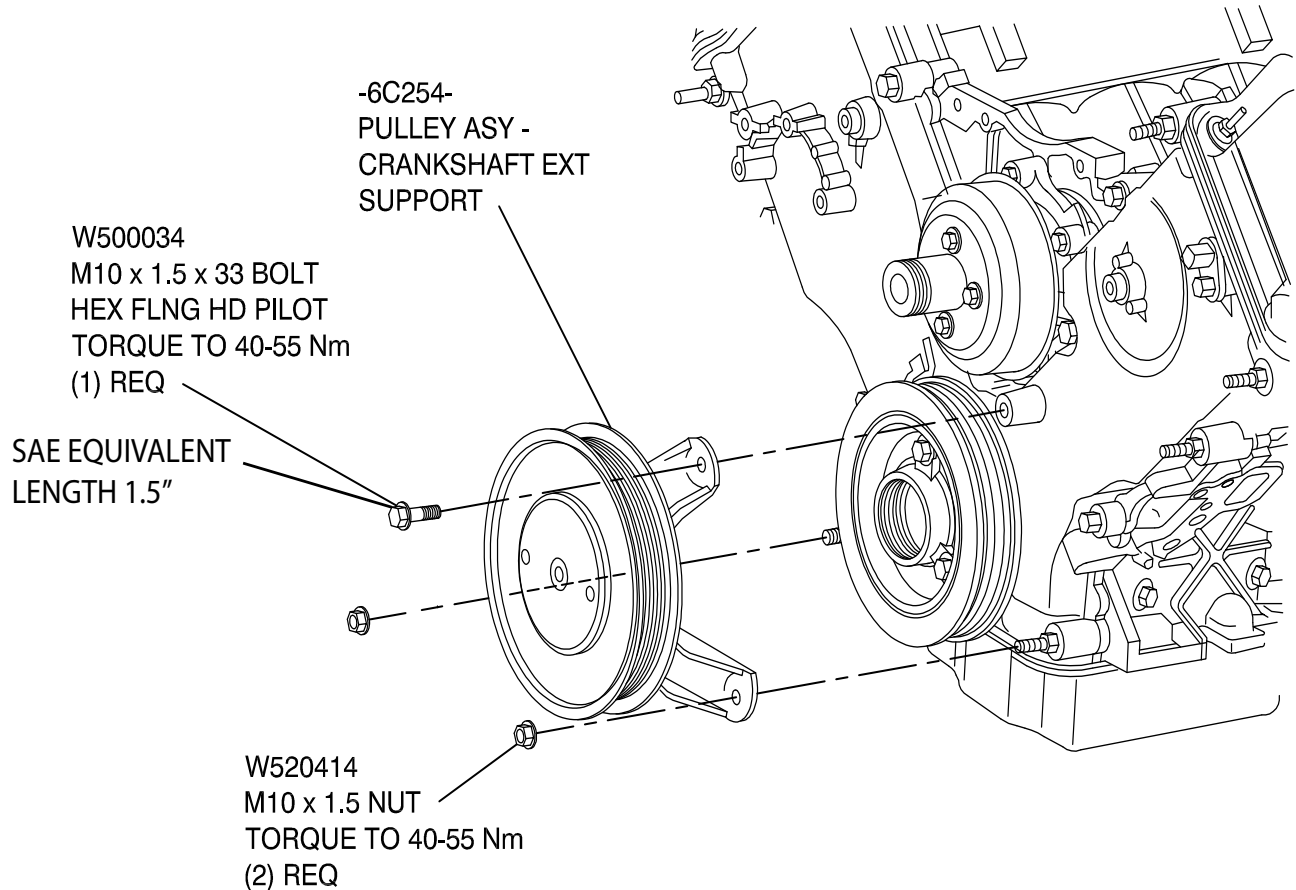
Install Pulley Assembly Crankshaft Ext Support
